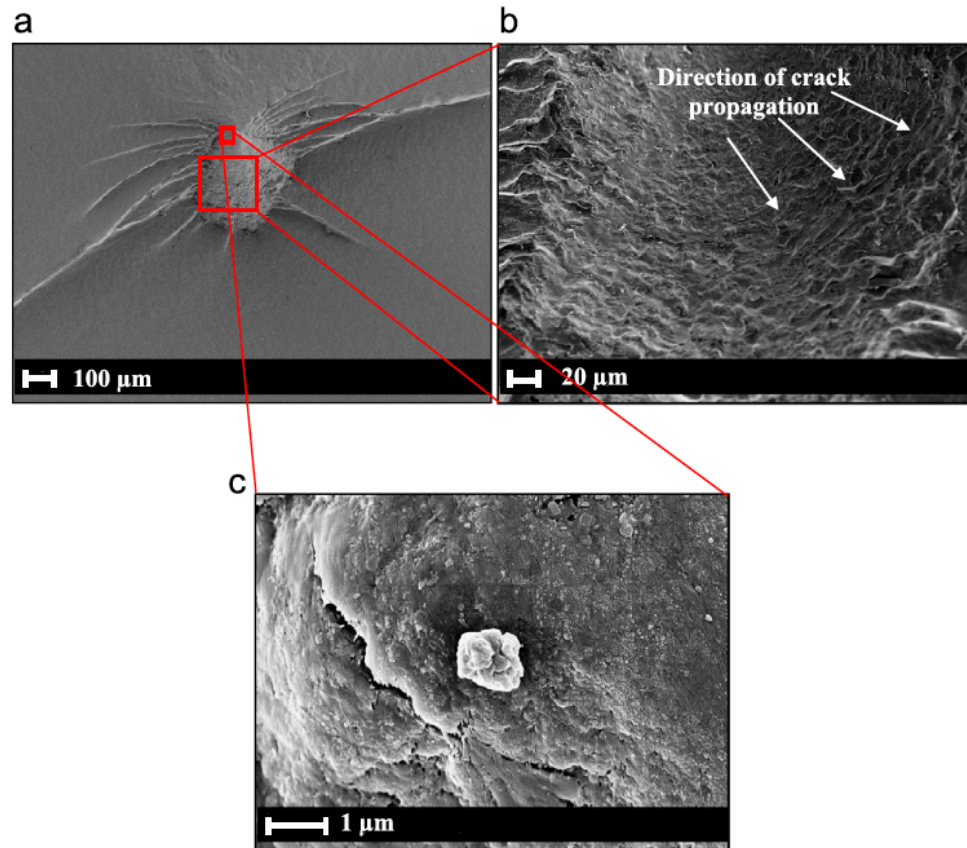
(a) Fracture surface of a fatigued specimen at 0.025 mm/mm strain amplitude showing the incubation and crack propagation region, (b) the direction of crack propagation, and (c) incubating particle.
